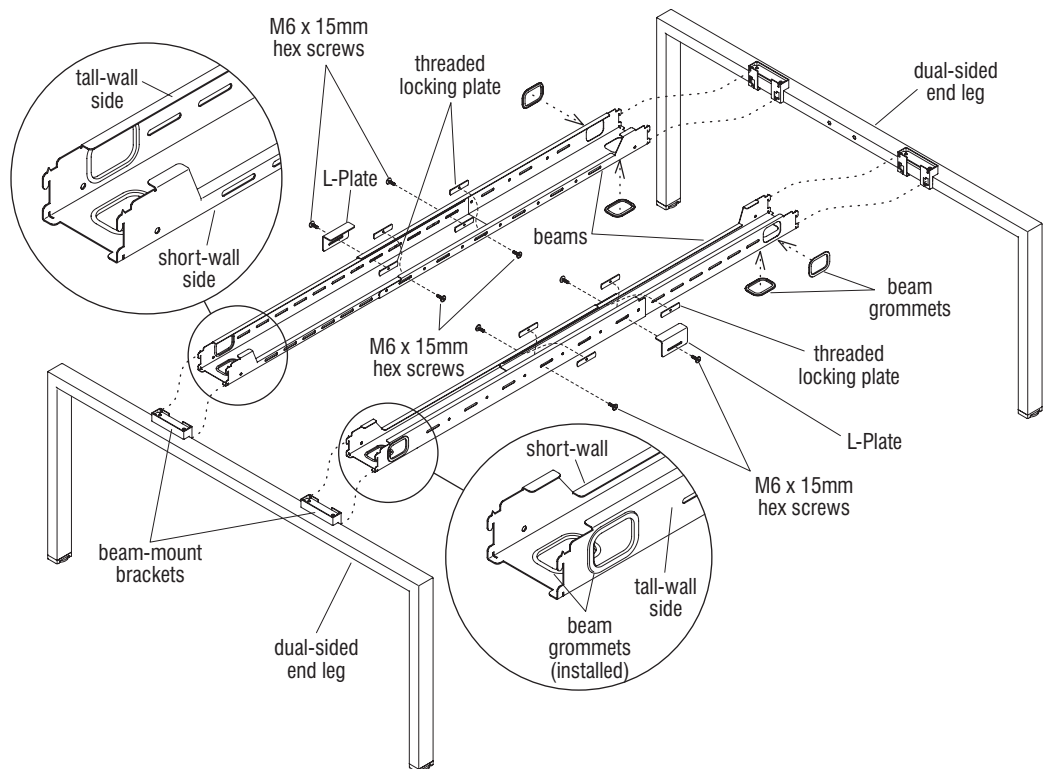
Dual-Sided Stand-Alone Benching - Beams & Legs Assembly
